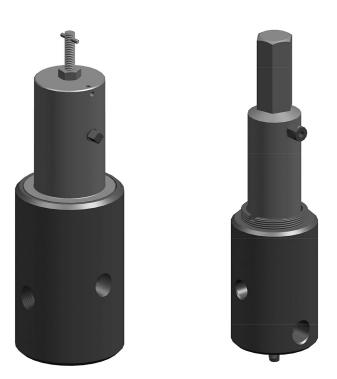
Model 1760/1761 Back Pressure Pilot and 2760 Back Pressure Pilot
